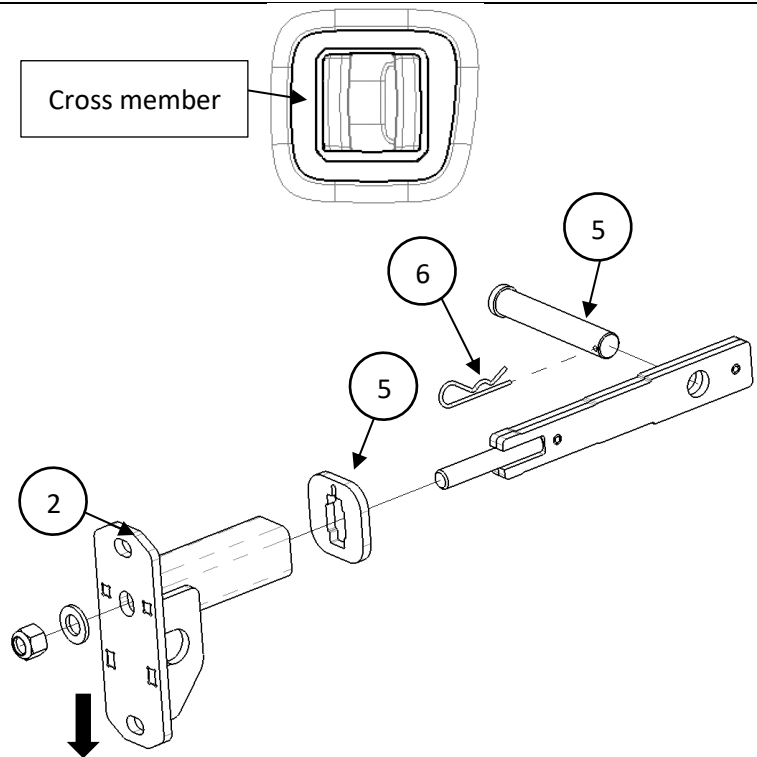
Mounting assembly for Peterbilt 579 and Kenworth T660 & T680 OEM bumper receiver holes with cross member A (driver side shown).
